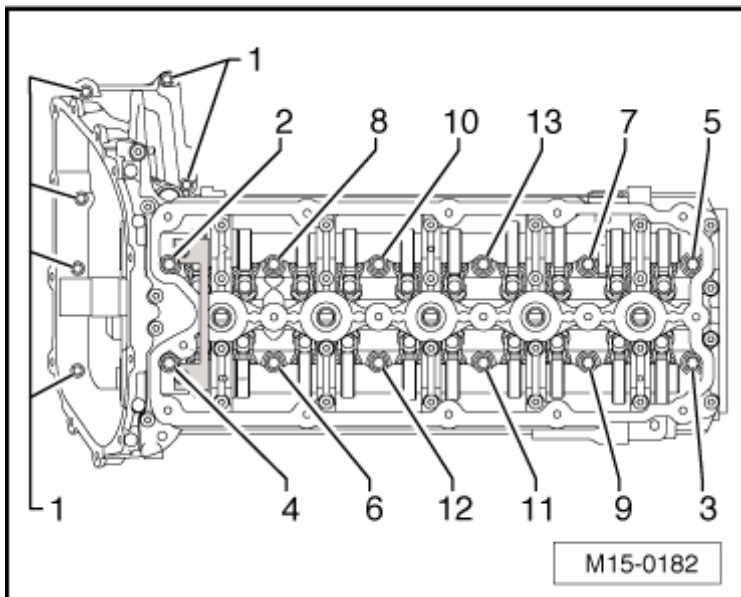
Removing Cylinder Head Bolts In Sequence Specified
